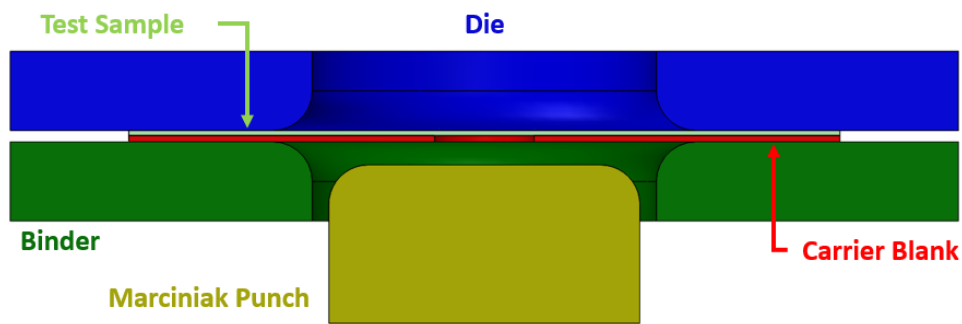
Marciniak test components schematic. Position of components is taken during clamping prior to the forming stroke.
